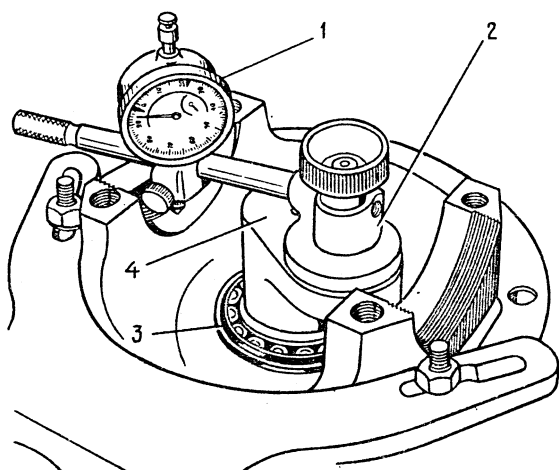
Determining the Thickness of Drive Pinion Adjusting Ring:
